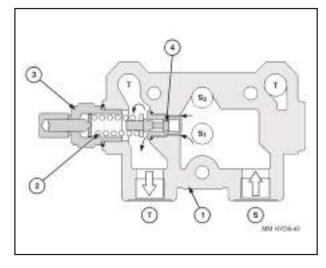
SYSTEM RELIEF VALVE OPEN
